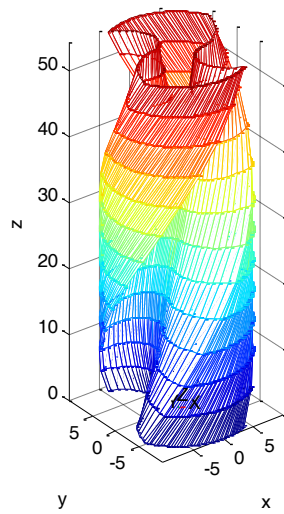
The three-dimensional flute and its cross section of the drill machined using the No. 1 grinding wheel.
